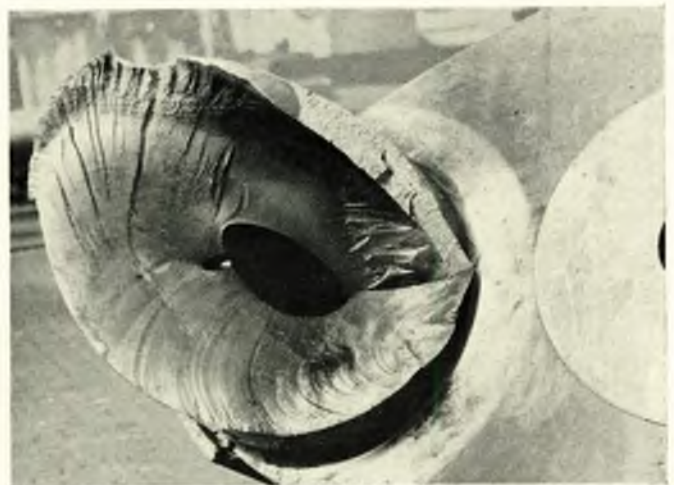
Torsional vibration fatigue failure in crankpin of semi-built generator crankshaft (Case X)
